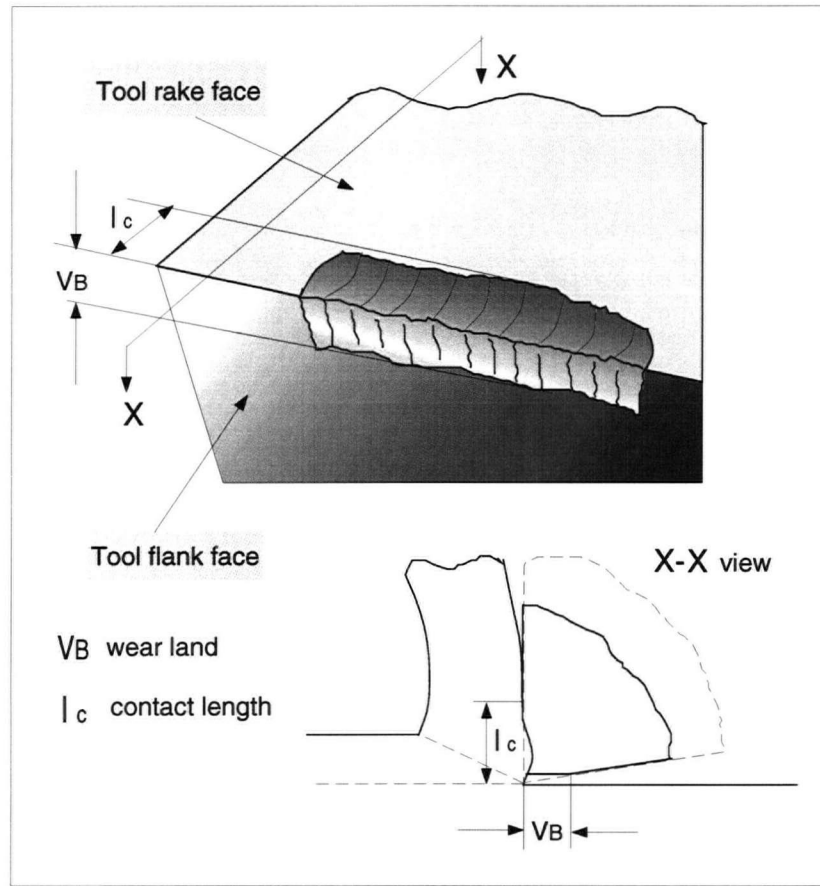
Illustration of measurement of contact length l_c and tool wear land VB from the cutting tool
